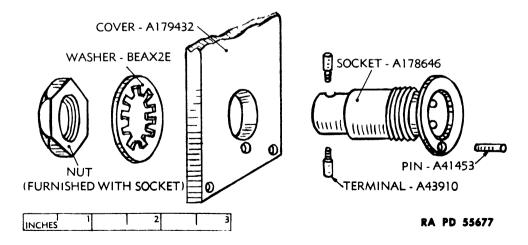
Socket Assembly in Deflection Worm Housing Cover—
